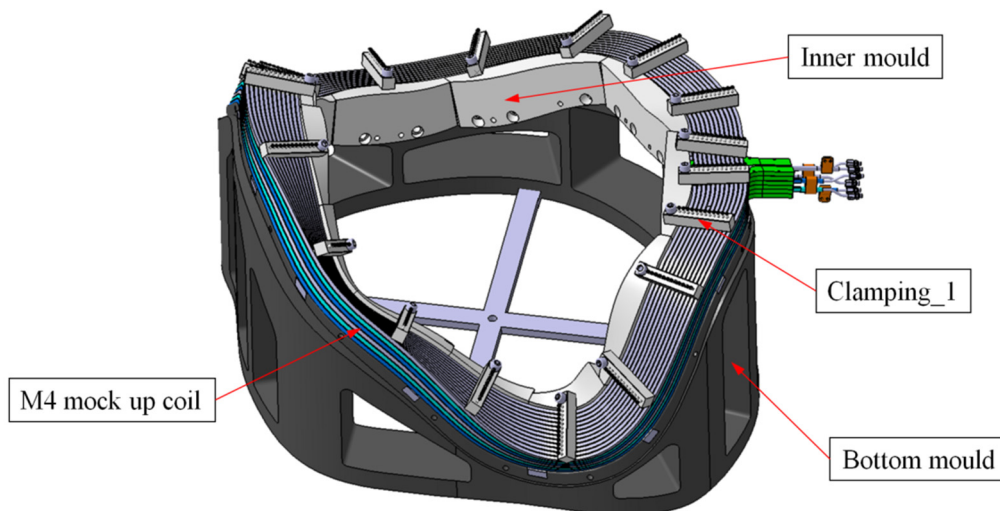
The winding mould for M4 mock up coil
